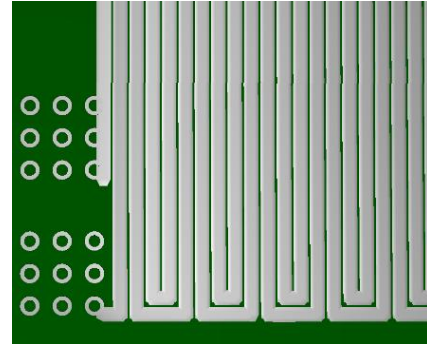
Serpentine shaped PCB copper wire layout, incl. detailed connector pads.
